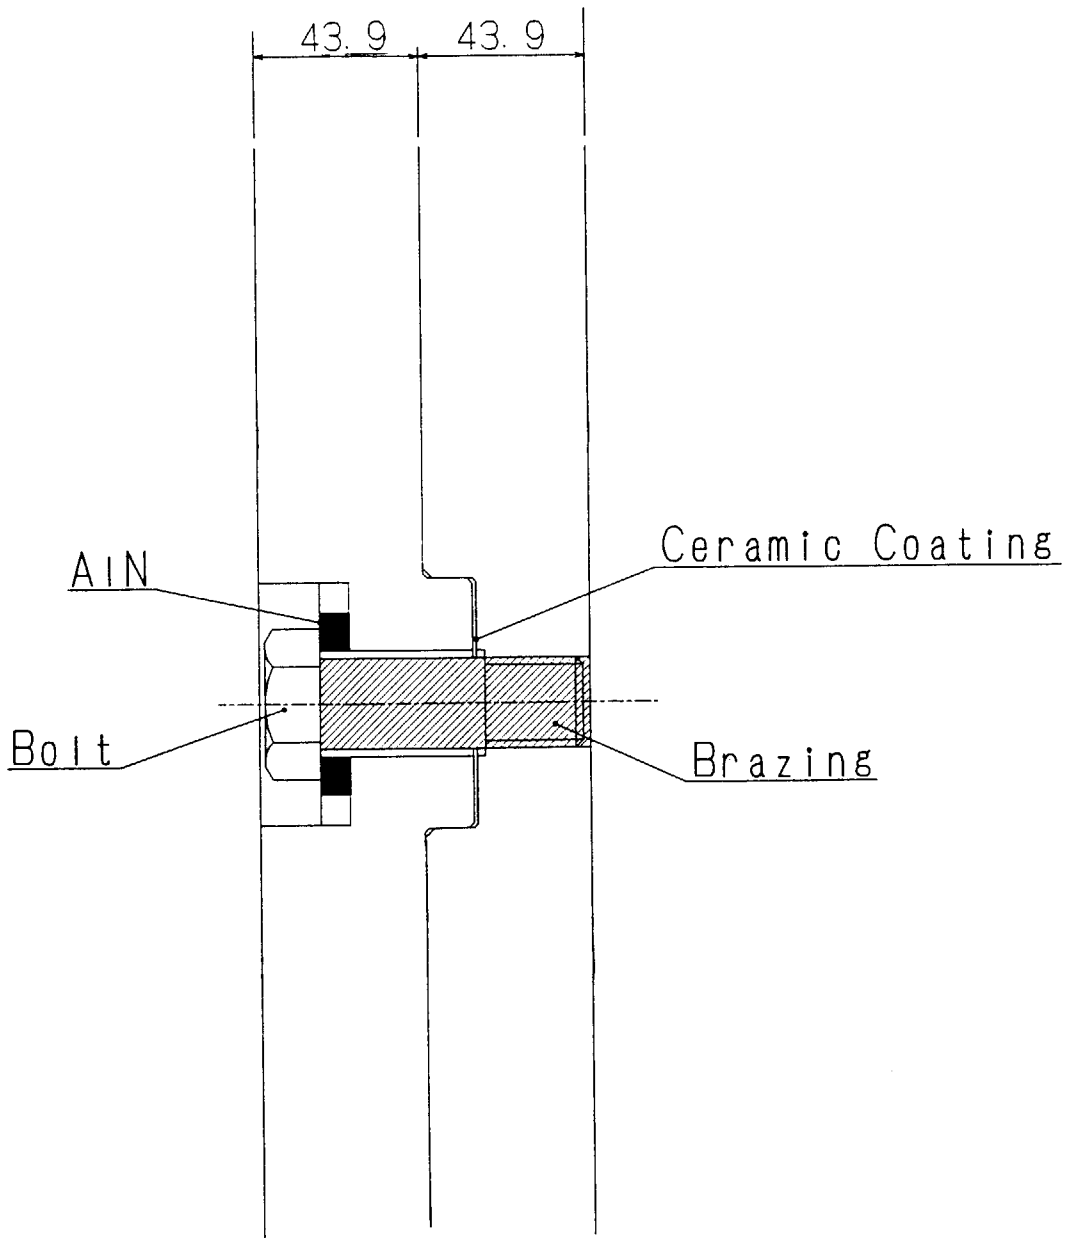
Bolt Joint in Shield Plate
